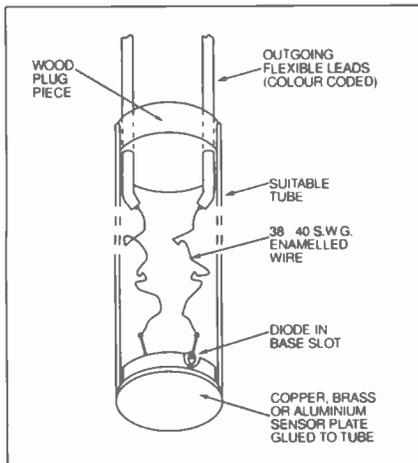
General probe assembly details. The tube can be an old plastic pen barrel or a piece of paxolin tubing.
